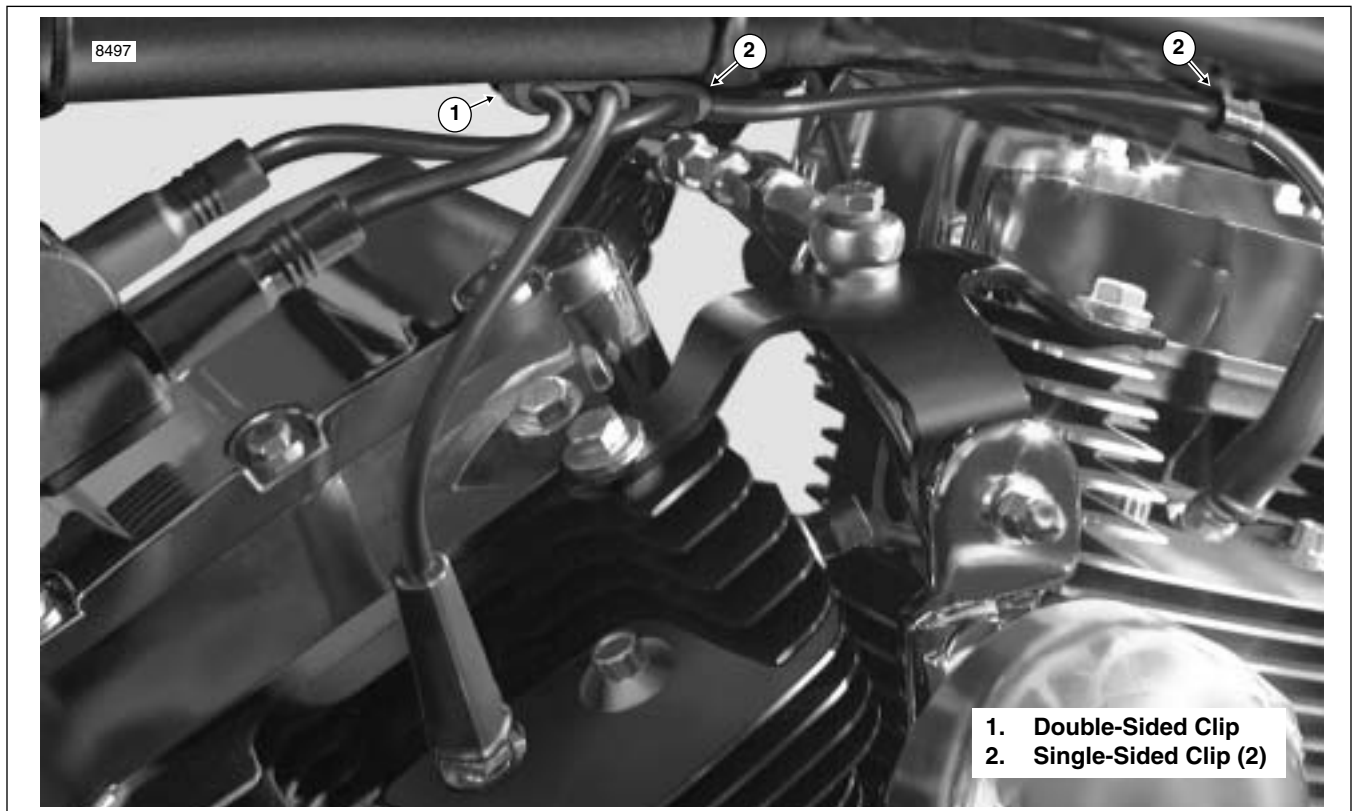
Spark Plug Cable Clips (Left Side View)
